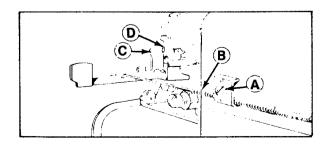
THROTTLE CONTROL ADJUSTMENT
